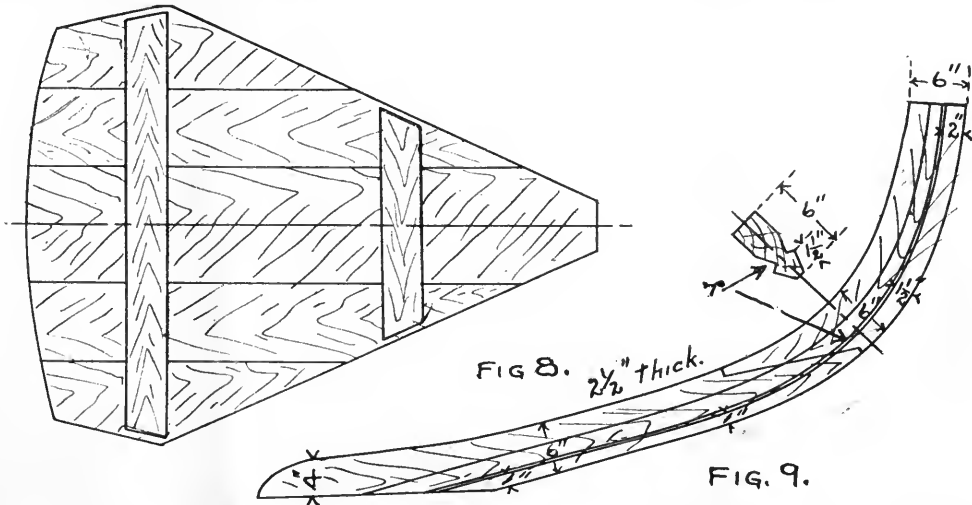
shows the completed stem, the outline of which is given in Fig. 6. It is $2\frac{1}{2}$ in. thick. While it may be possible to obtain a curved piece out of which it may be cut, it is not likely; therefore it will probably be made in two parts scarphed as shown in the figure. The length of the straight part of the scarph should not be less than 10 in., and its exact position will depend upon the stock obtainable. The two portions are cut out separately and fitted together to match the paper pattern already laid out. They are fastened together with pieces of $\frac{3}{8}$ in. galvanized rod riveted over washers inside and outside.
